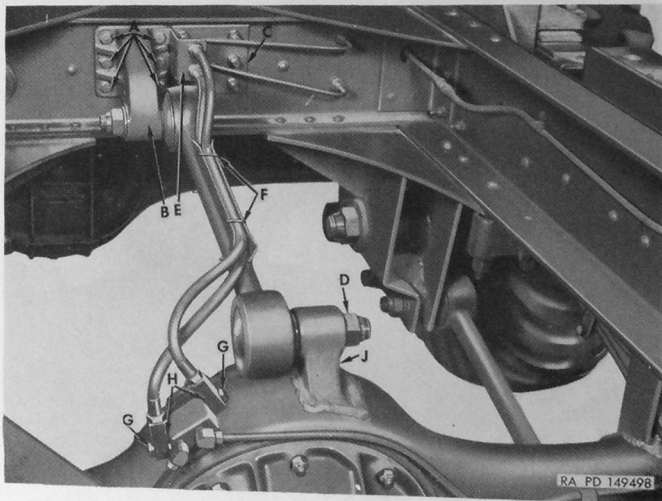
Rear rear axle upper torque rod and lines disconnect points.
